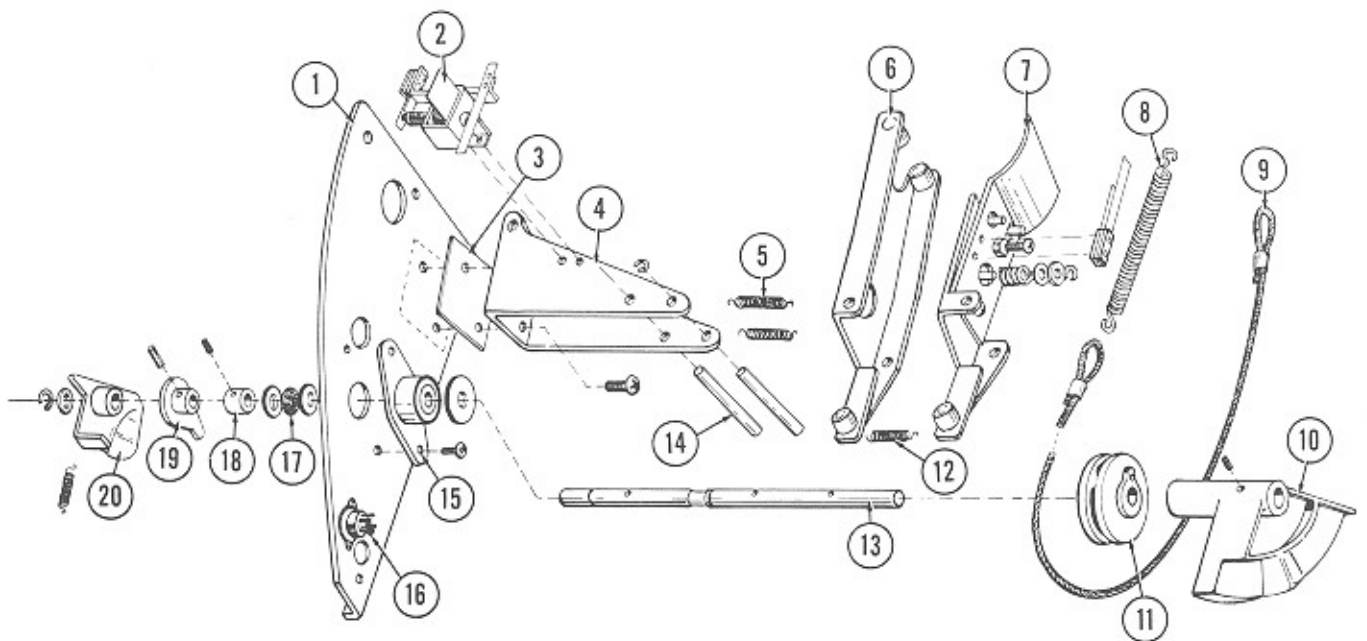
MOUNTING PLATE AND SHAFT ASSEMBLY
